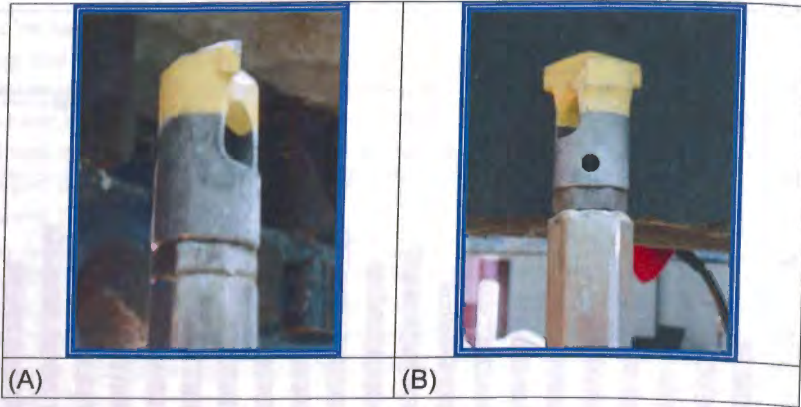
(A) Standard drill steel, and (B) damped drill steel using a constraining layer.
